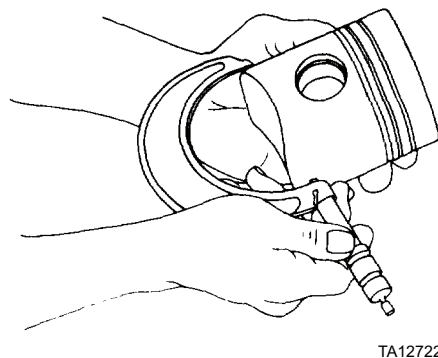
Measuring Piston Ring Side Clearance with Feeler Gauge.
